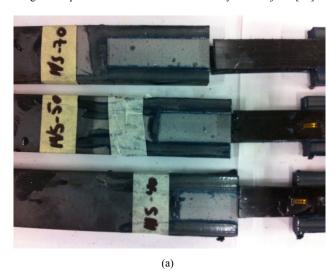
The possible failure modes in adhesively-bonded joints[10]
